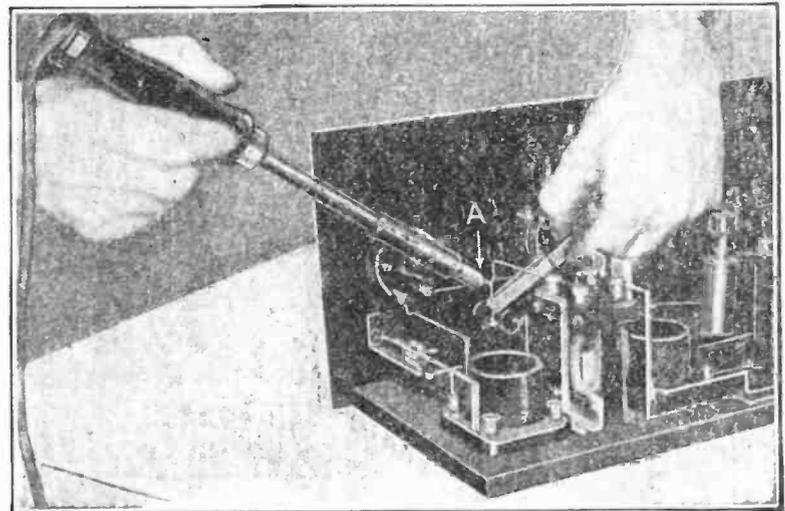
Pliers are essential when soldering a joint like this. The bus-bar must be held steady until the soldered connection cools.
